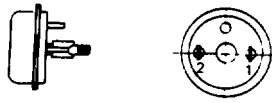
Transistor outline drawings (Sheet 7 of 12).
